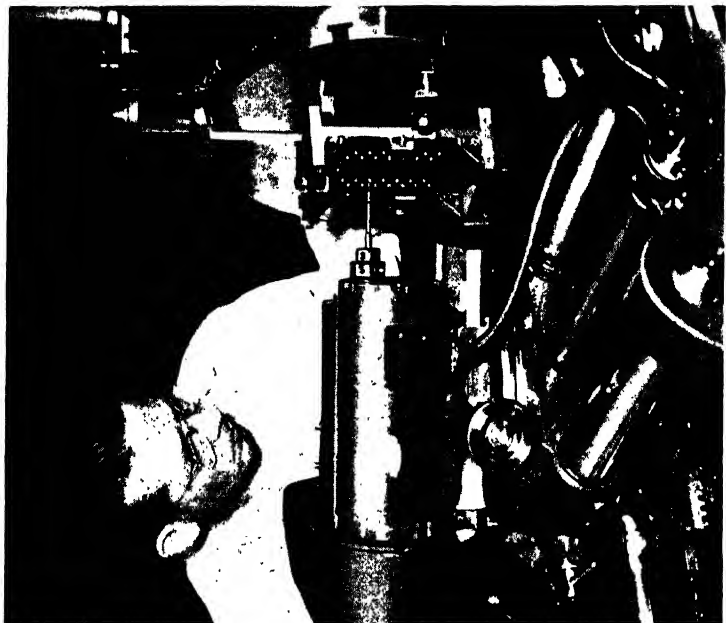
Performing a Series of Accurate Drilling and Boring Steps on a Small Jig Plate by the Use of a Jig Boring Machine
